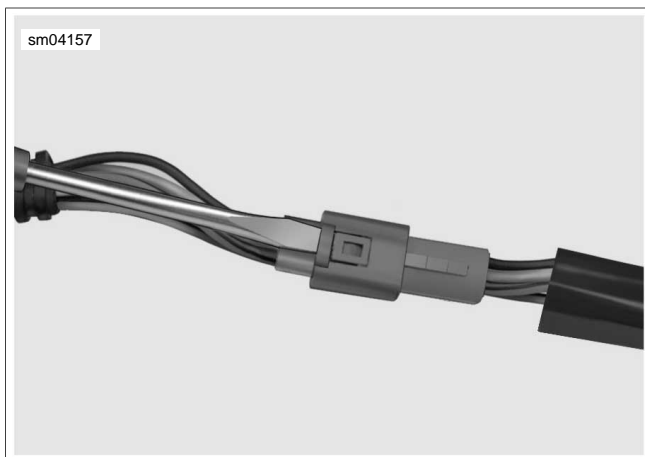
Gently Insert Screwdriver to Disconnect Twist Grip Sensor Connector
